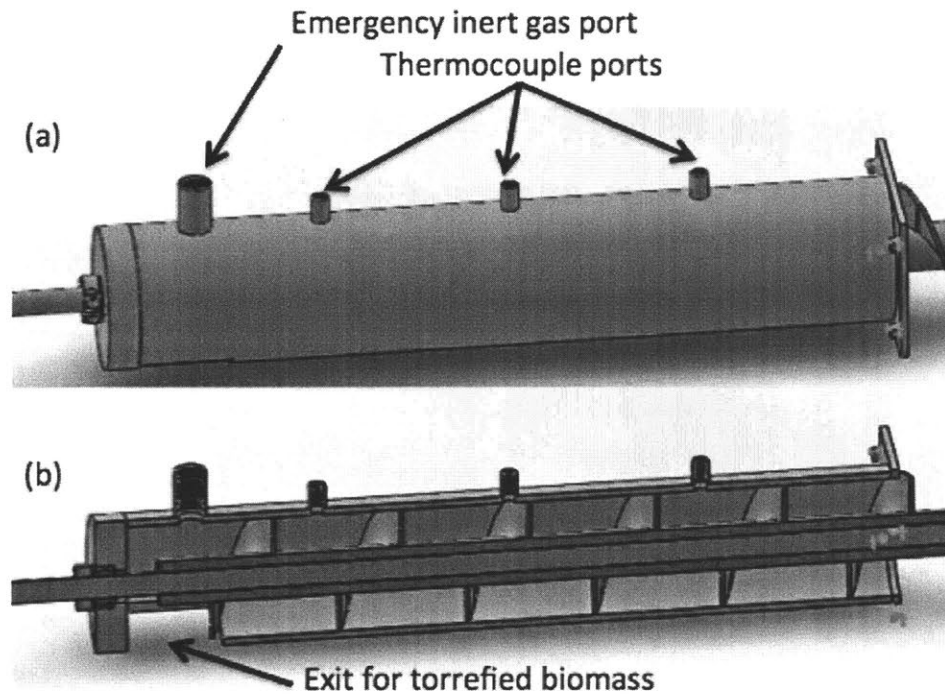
(a) SolidWorks rendering and (b) cutaway view of the char-cooling segment.
